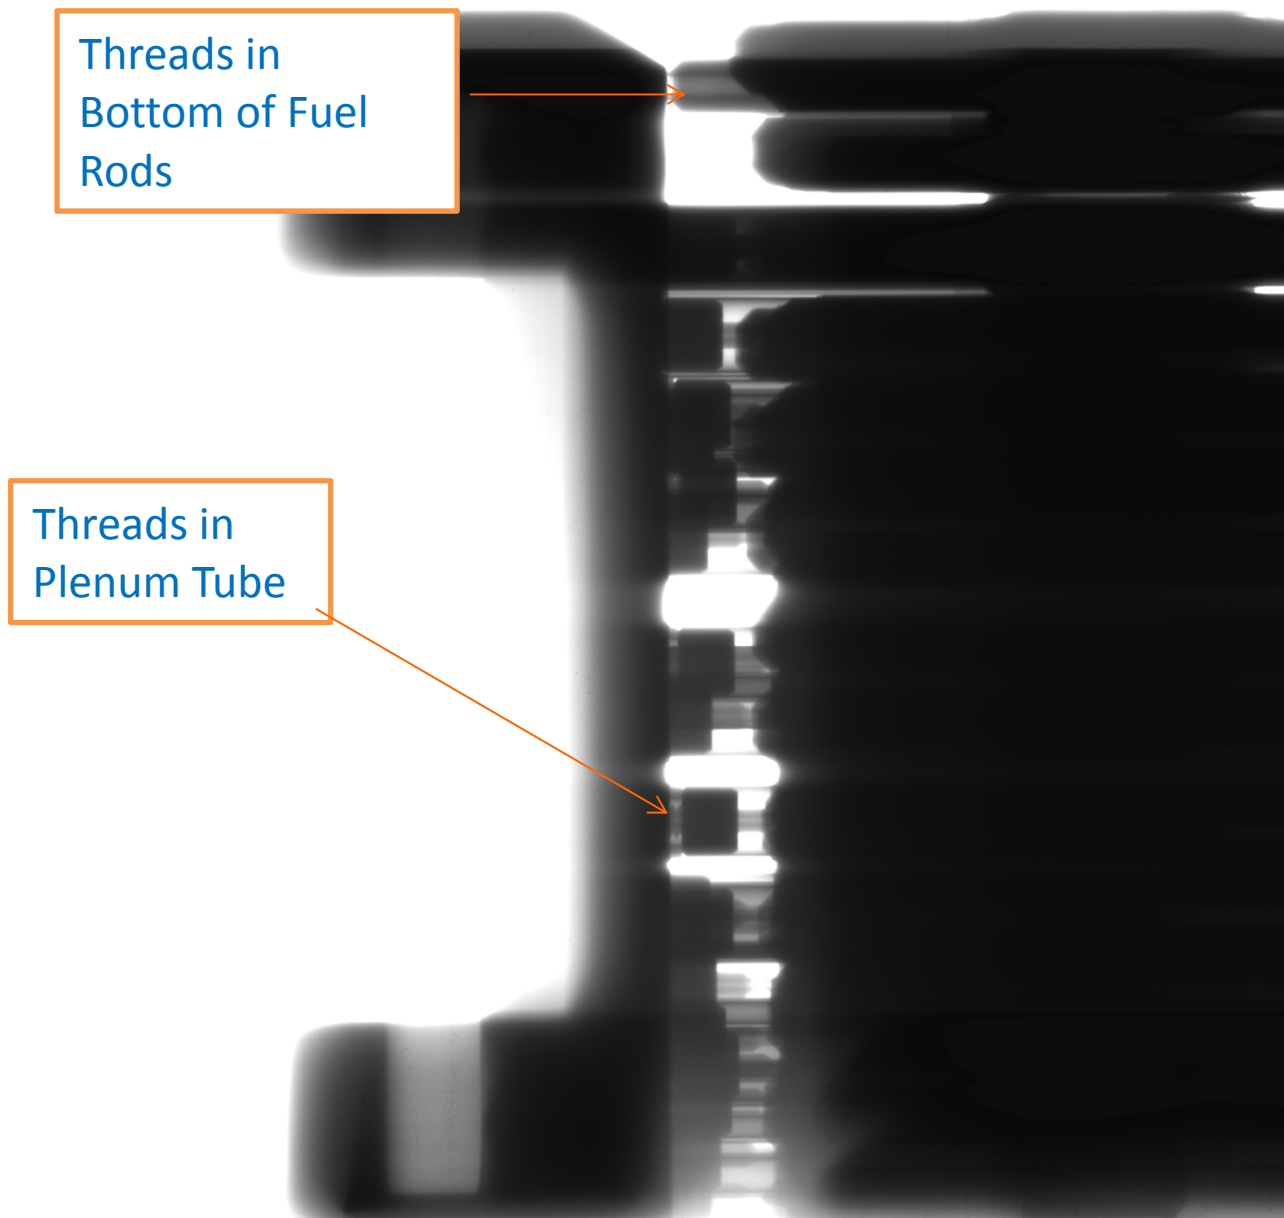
Bottom image of INL dummy fuel assembly showing threads in fuel rods and plenum tubes
